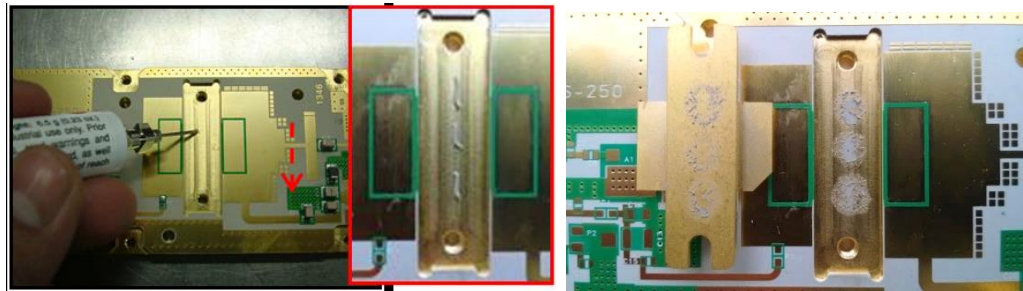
Example of applying 3 small lines of silver conductive grease on the cavity center. Photo on right side package removed after bottle down showing silver conductive paste spread
